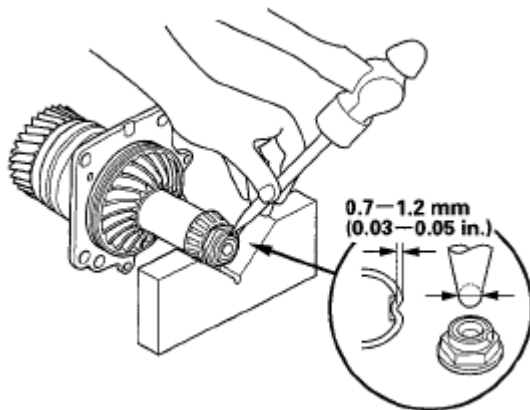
Removing Transfer Holder Assembly Of Transfer Housing
